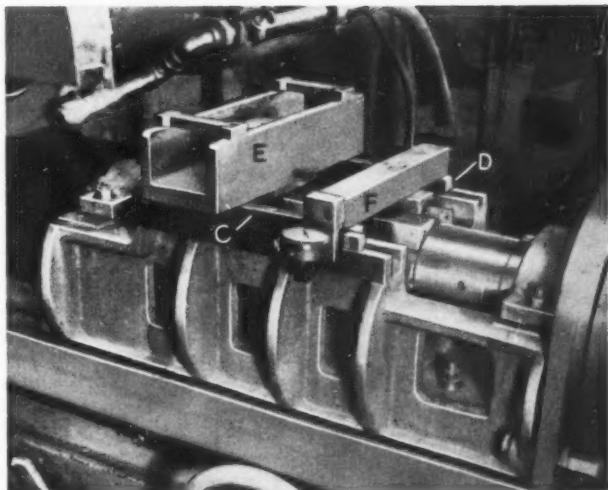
Special Gauges are Employed for Checking the Tool Slide at the Finish Grinding Operation, while it is Still Mounted in the Fixture
